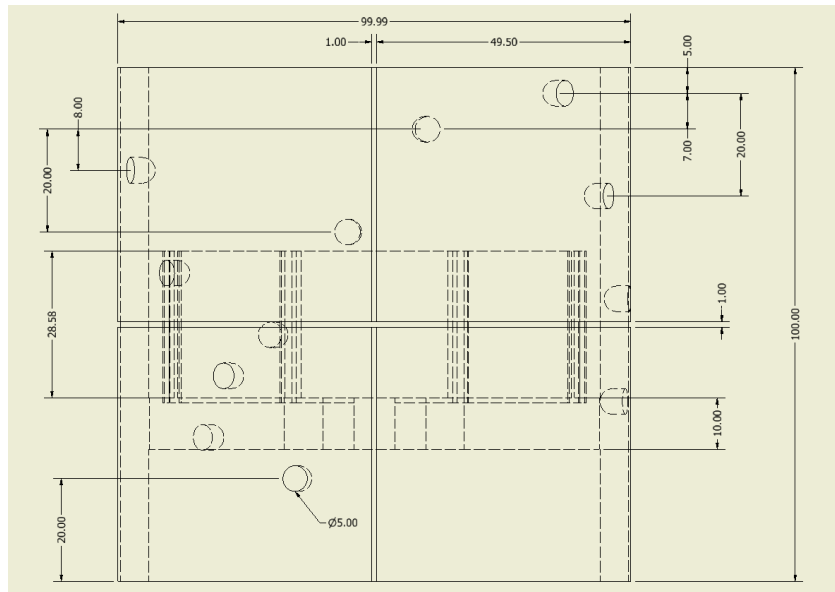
The engineering drawings including the detailed dimensions of the custom phantom.
